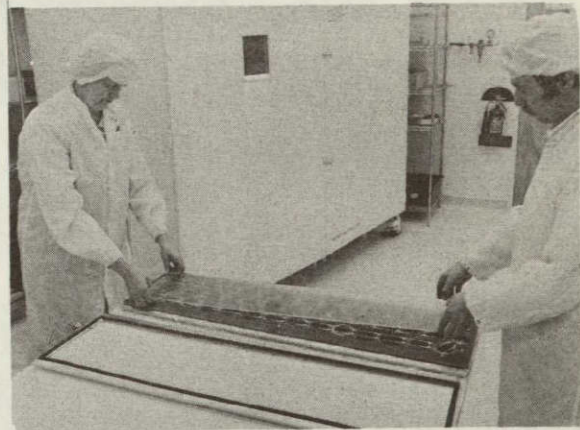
Module String and Glass Loading Into Vacuum Fixture
